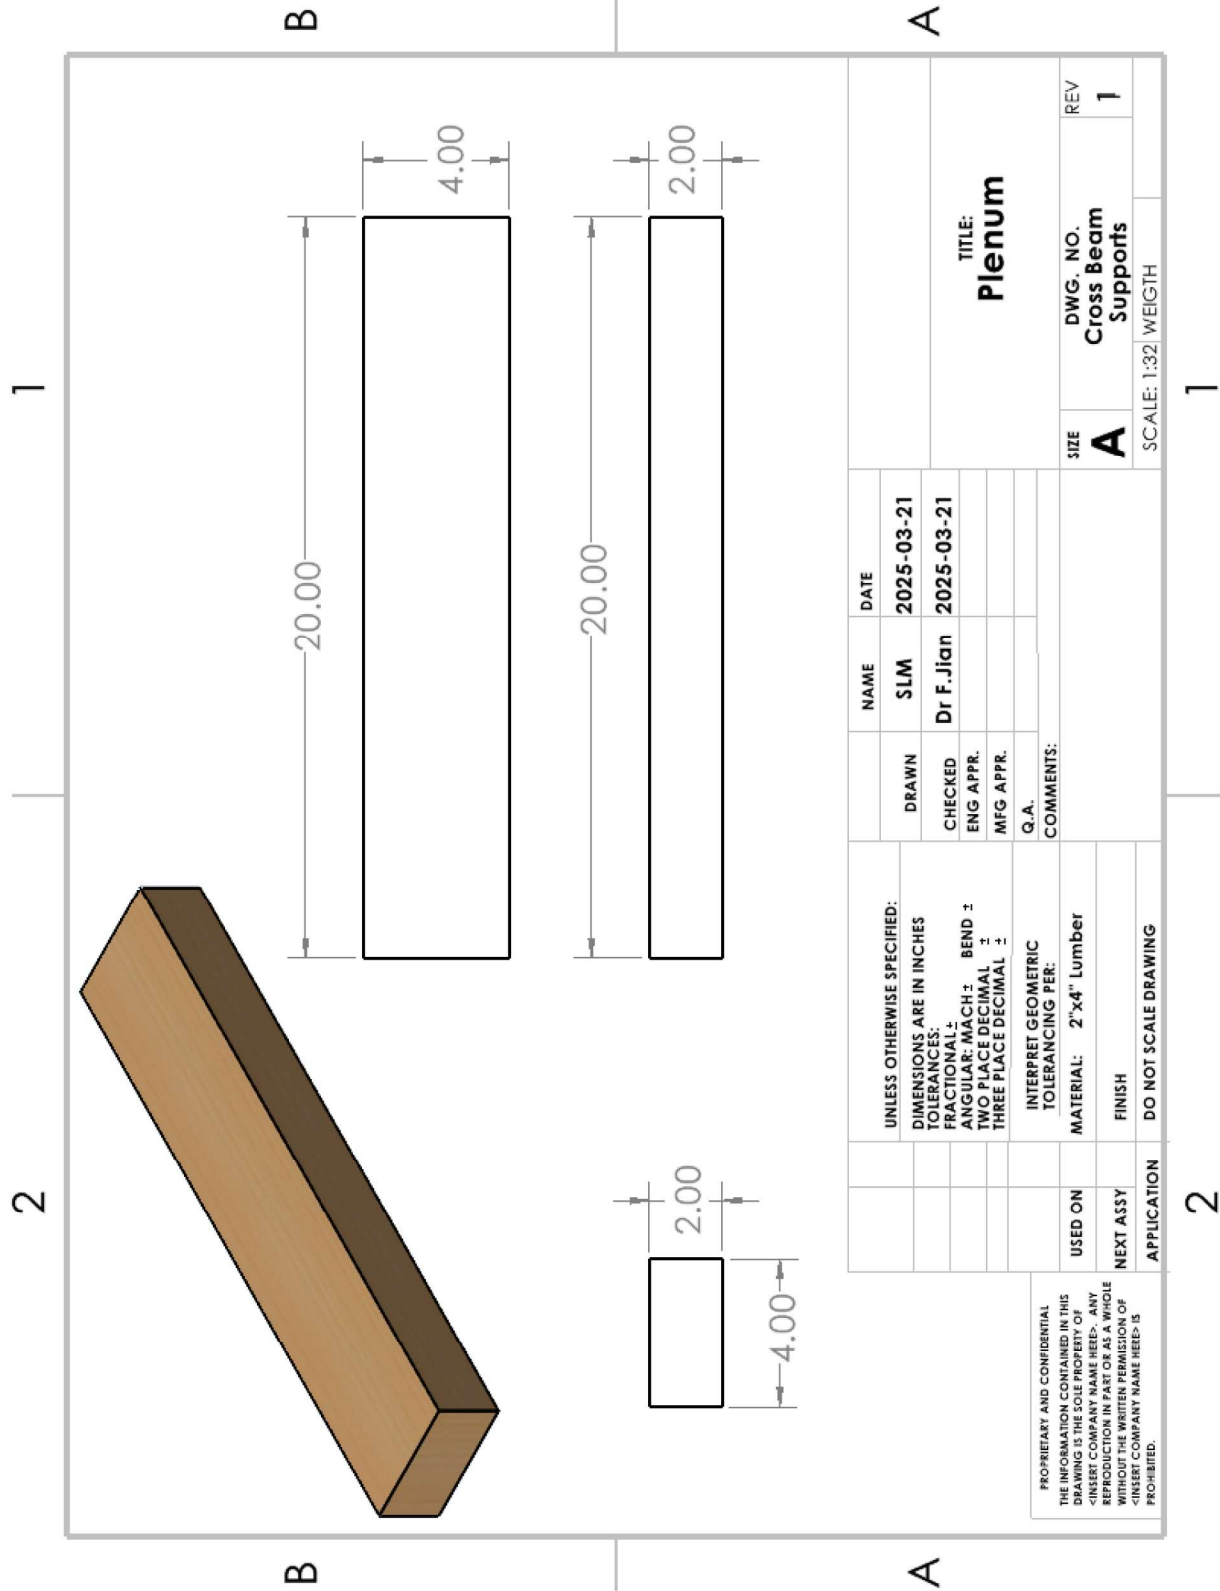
Detailed Engineering drawing of the Cross Beam Supports.
